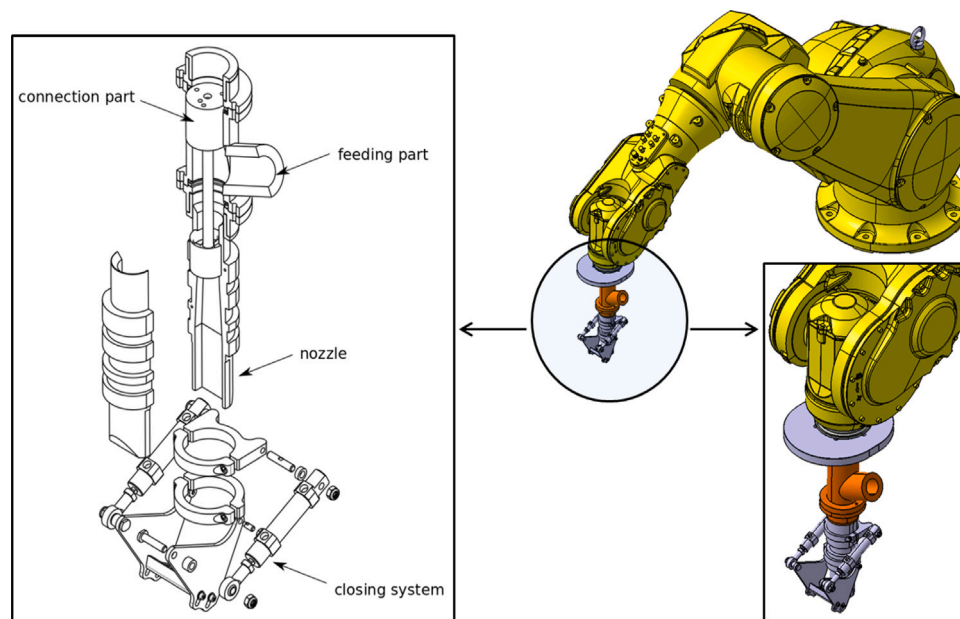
Printhead prototype design which is mounted on an industrial manipulator with an exploded-view drawing and a close-up view.
